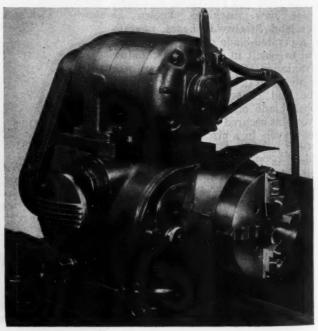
Improved Headstock of Cincinnati Grinder with Standard Lathe Chuck Mounted on the Modified Spindle Nose
